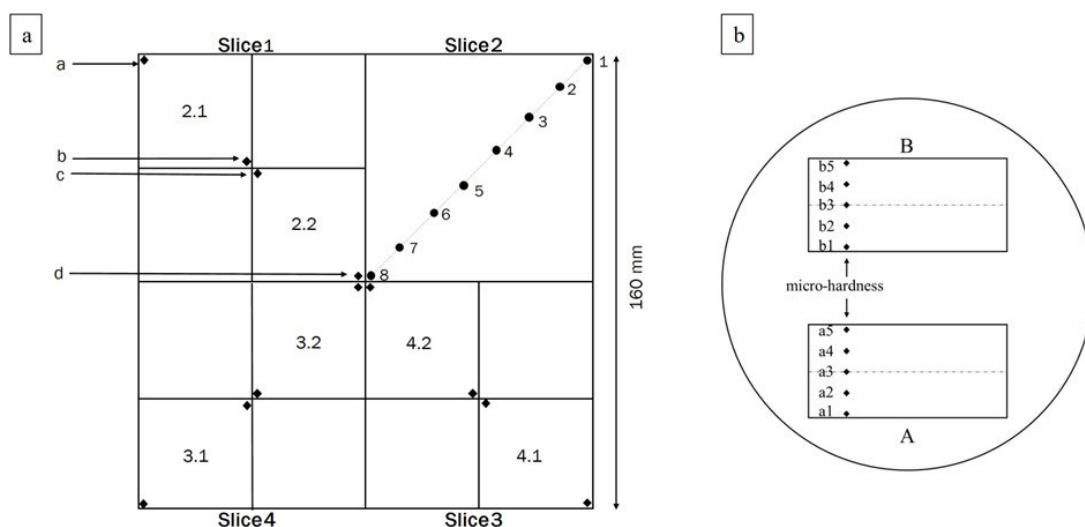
Scheme of sample collection, a) billets samples, b) wire rods samples.
